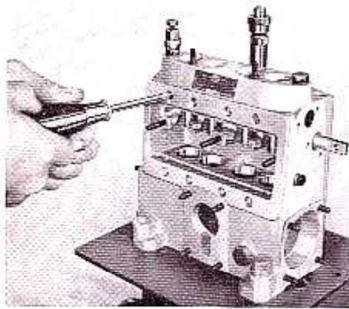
UNSCREWING THE BARREL LOCKING SCREWS
